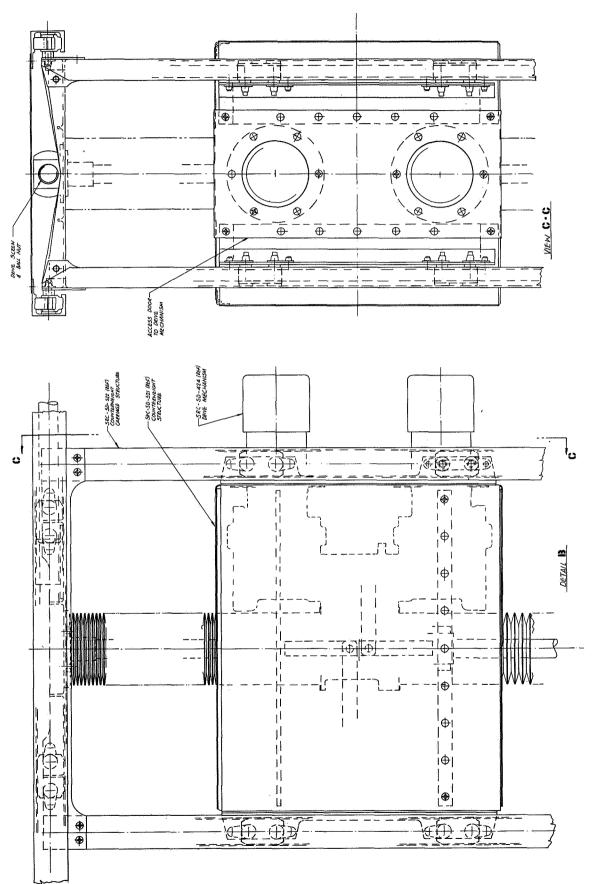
Swing Frame Structural Detail (SRC-SD-518)
